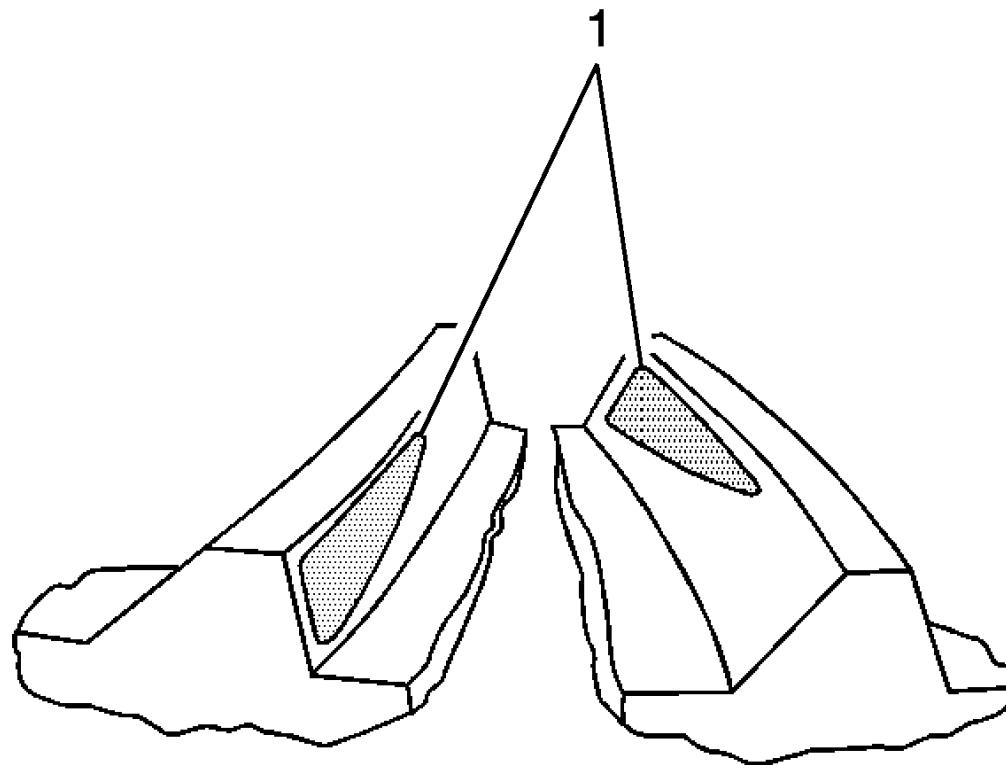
Identifying Drive Side Heel - Coast Side Toe Contact Pattern
